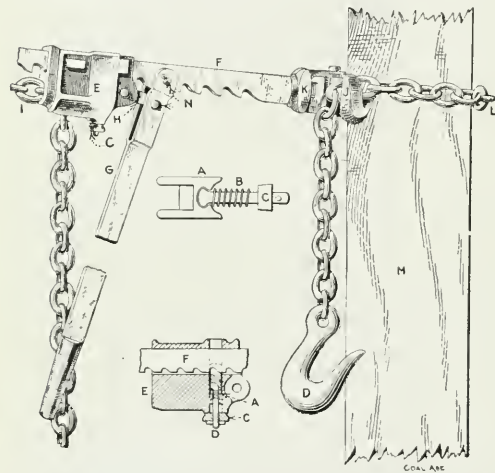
SHOWING DETAIL OF THE SYLVESTER MACHINE FOR DRAWING POST TIMBERS
